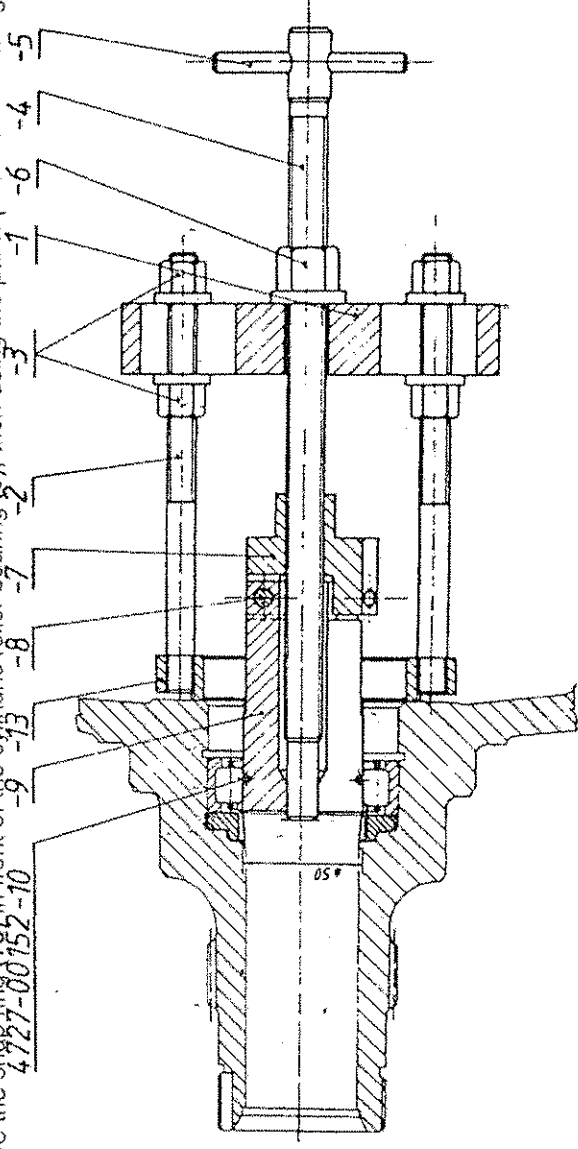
PULLING OUT THE CYLINDRIC ROLLER BEARING FROM THE SPINDLE
